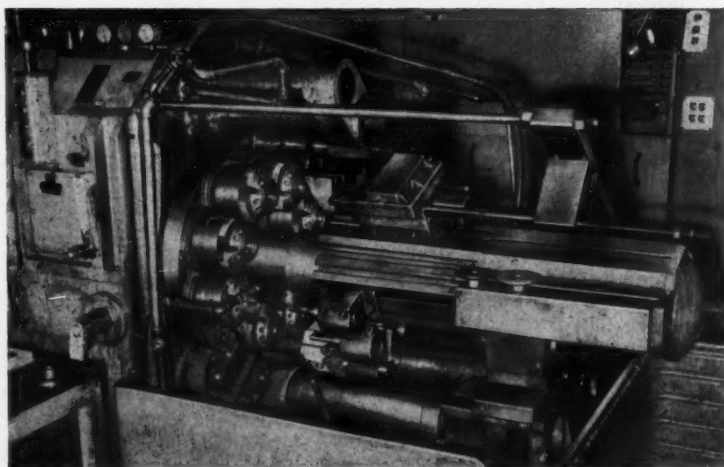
Preliminary operations on the cover casting are performed on this 8-spindle New Britain-Gridley chucking automatic. Kennametal Kendex clamped-tip tools with indexable, throw-away tips are widely employed
